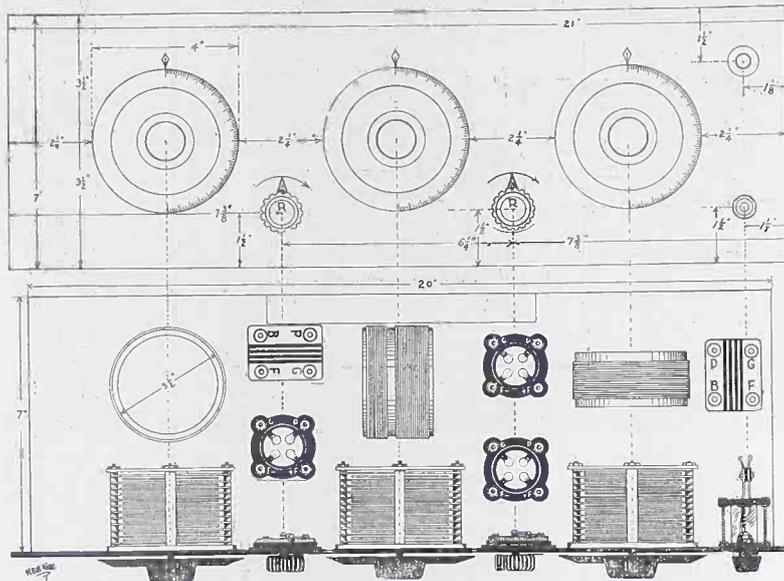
, the panel layout and assembly plan for Rofpatkin's 3-Tube Reflex for the Novice.
